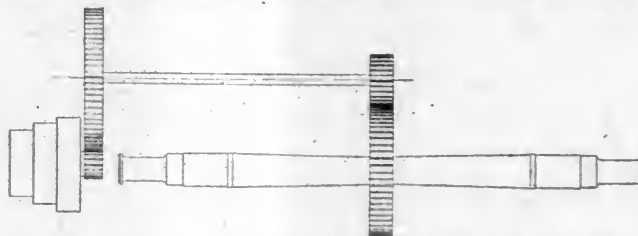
ORIGINAL ARRANGEMENT OF GEARING IN THE DRIVE OF A CAR-AXLE LATHE.
